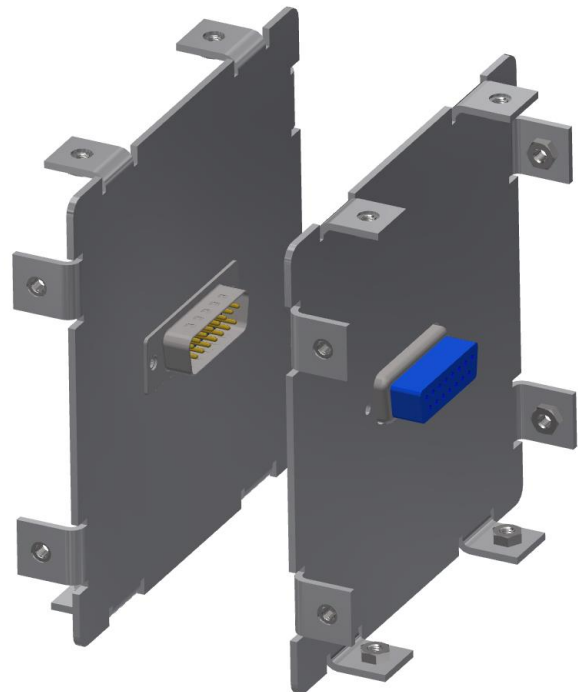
CADD models of the D-Sub connector interface. In this model, the connector is mounting to the End mount and uses wires to connect to pins. It is possible to mount the connector to the end mount and solder through hole pins to a PCB.
